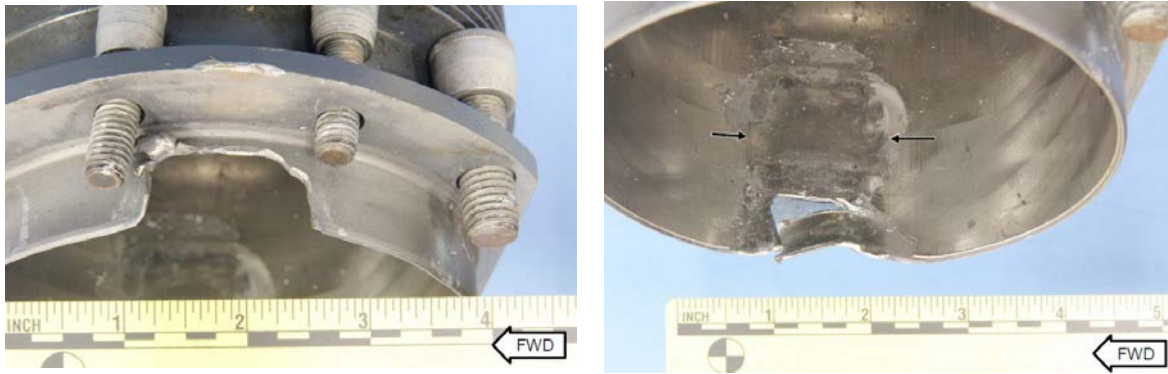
Cylinder damage caused by the connecting rod. (Source NTSB)
